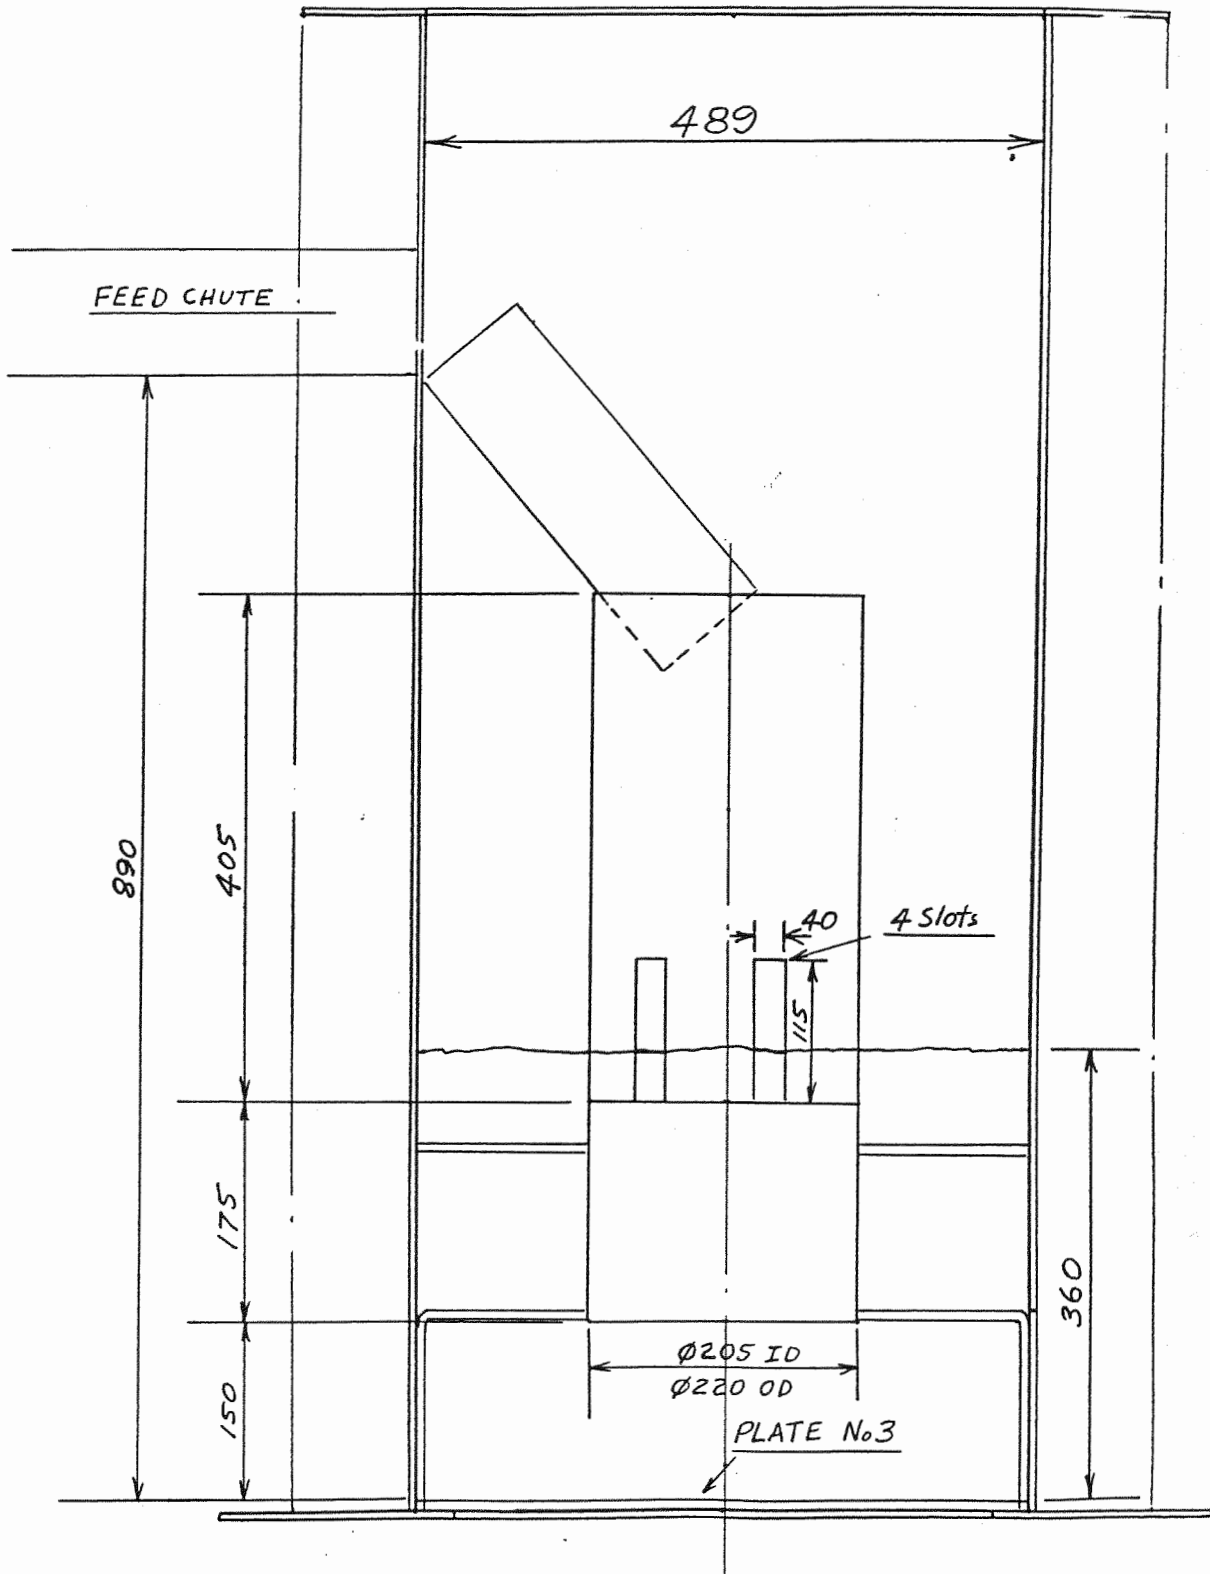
Combustor Tube Details, Combustor Run 4 & 5
